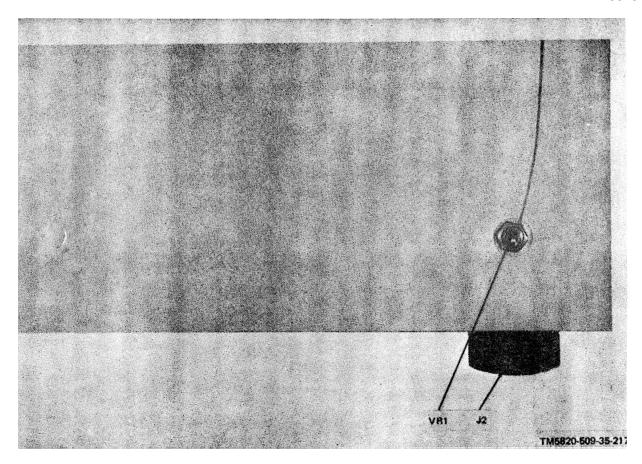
Test Fixture for Audio Frequency Amplifier AM-3506/PRC-47, Chassis Parts and Connector Location.
